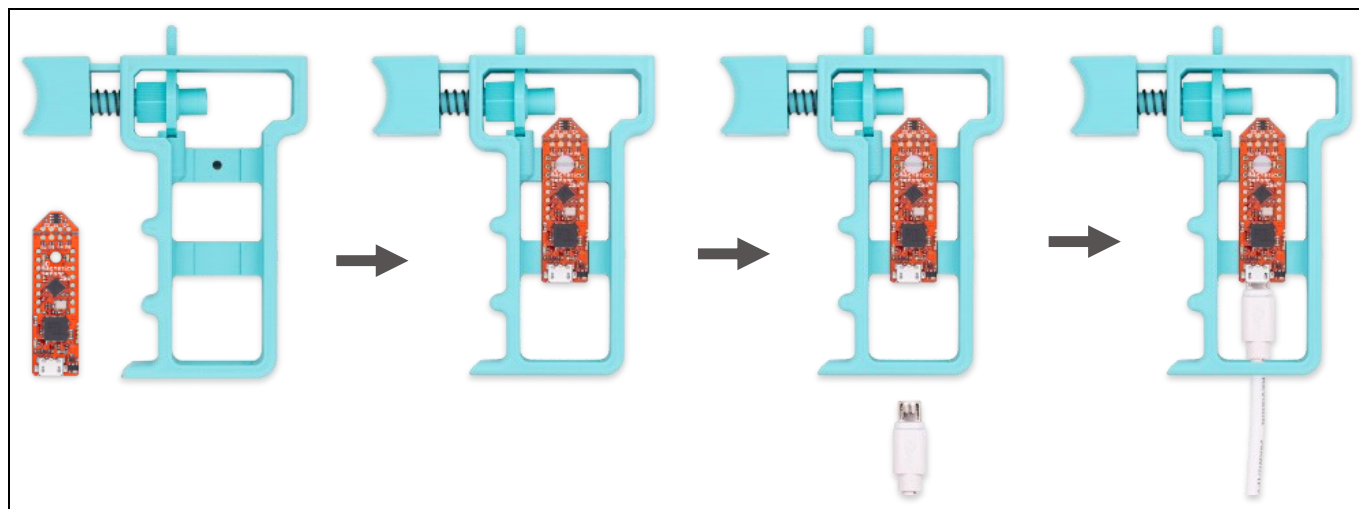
XENSIV™ DrillTriggerV2 - assembly
